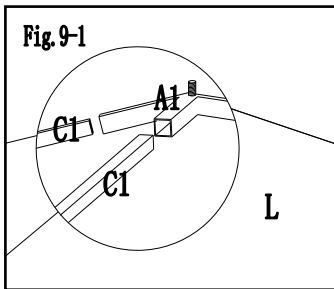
Insert small roof bar (C1) into small roof connector (A1), place the small canopy (L) onto the roof. Aligning the corners and stretching to fit.
